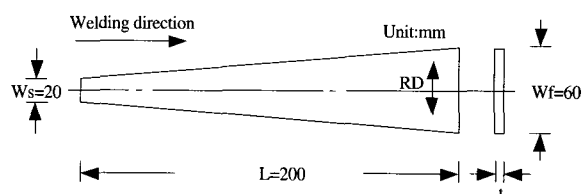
Shape and dimension of the specimen used in tapered specimen crack test.
